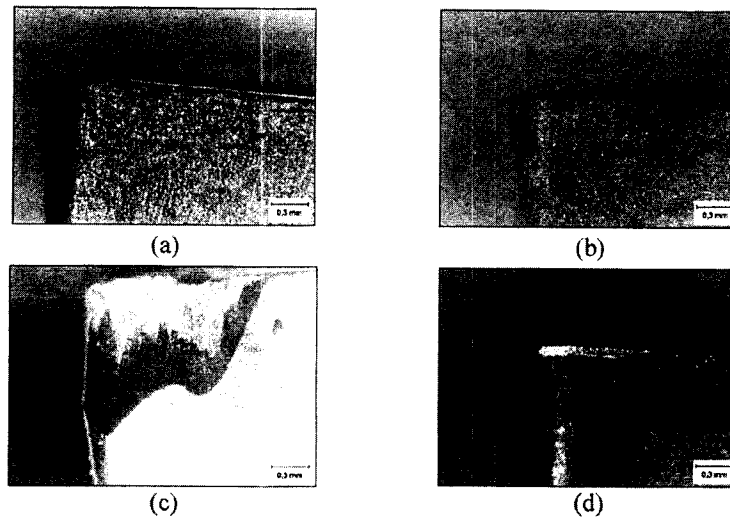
Aspect of tool surfaces subject to flank wear. (a) Fresh carbide tool. (b) Carbide tool after machining Al/SiC 0 % - $V_c = 273$ m/min. (c) Carbide tool after machining Al/SiC 10 % - $V_c = 273$ m/min. (d) Diamond tool after machining Al/SiC 10 % - $V_c = 273$ m/min.
